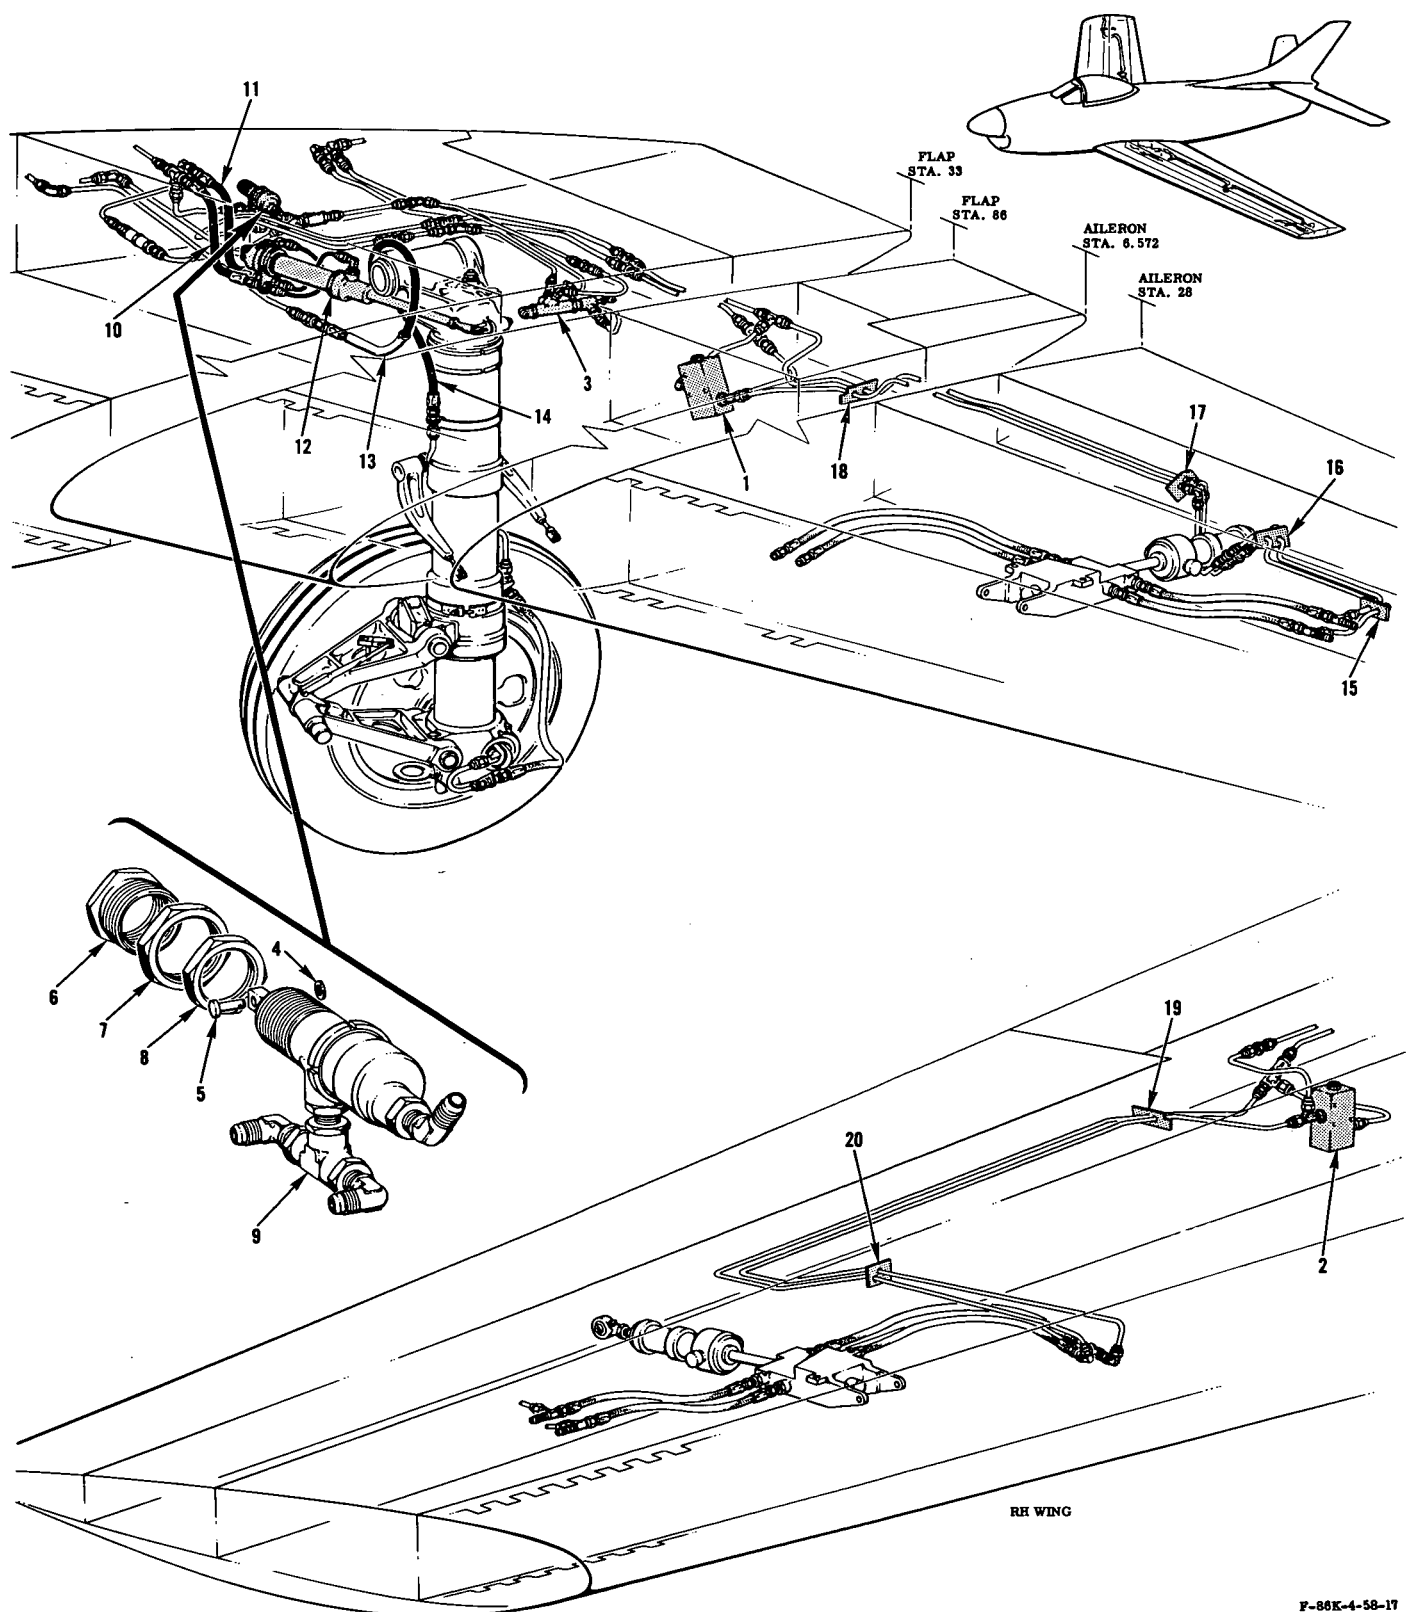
WING HYDRAULIC EQUIPMENT INSTALLATION
